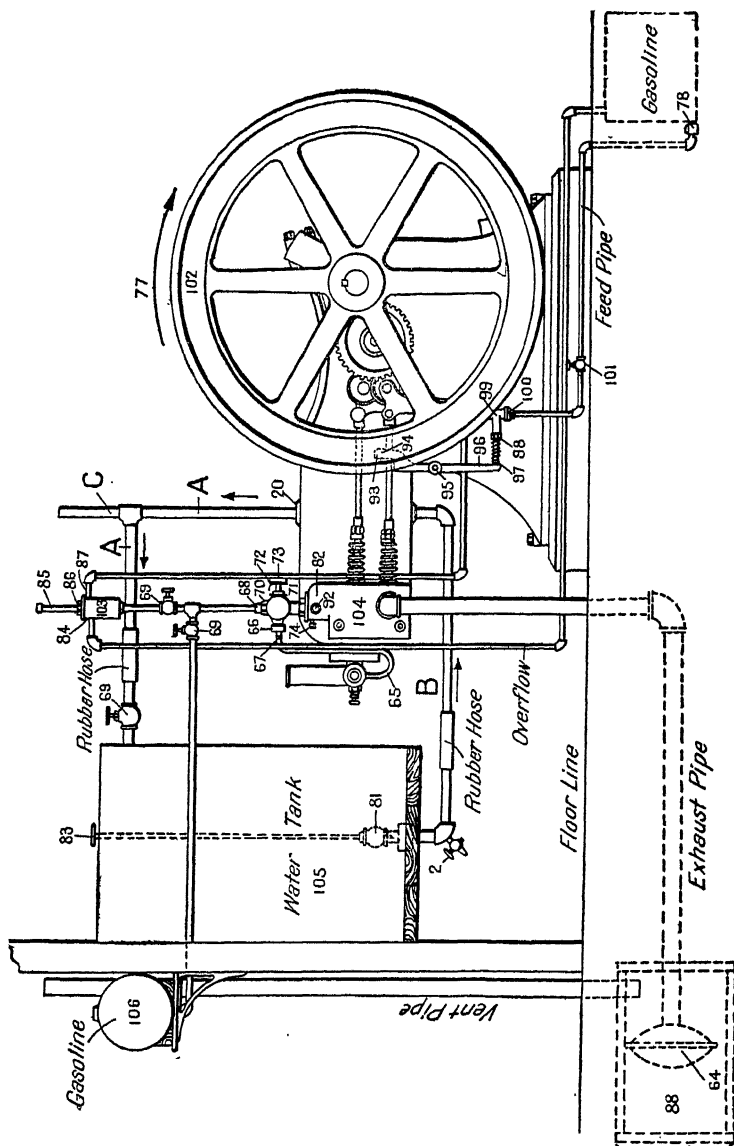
GASOLINE ENGINE INSTALLATION.
